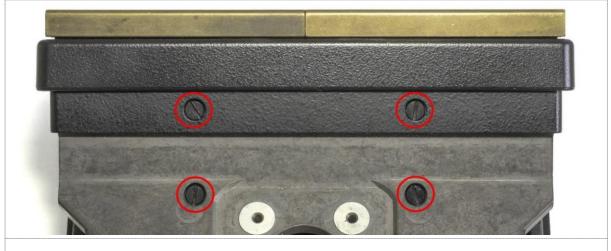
The front of the head seen from above. The slides have been pushed together making the head front to move outwards from the head base. This also reveals two more screws that attach the front to the base (all four screws with reds circles.)
